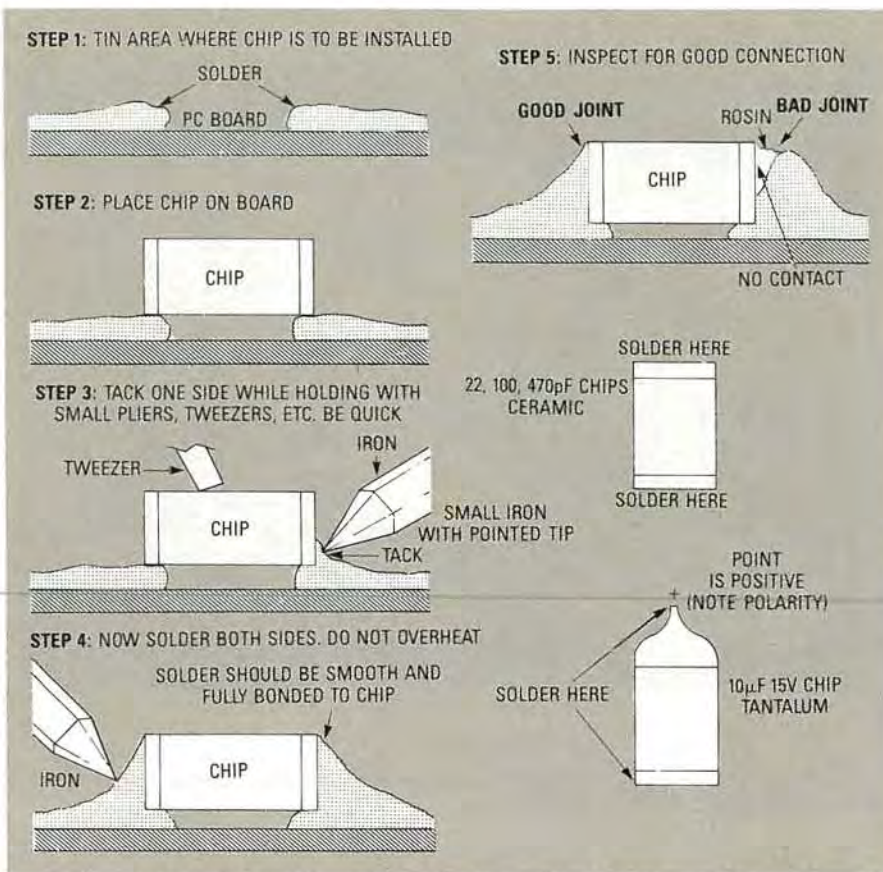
IF YOU FOLLOW THESE STEPS when soldering the chip components to the PC board, you'll have no problems with them.
